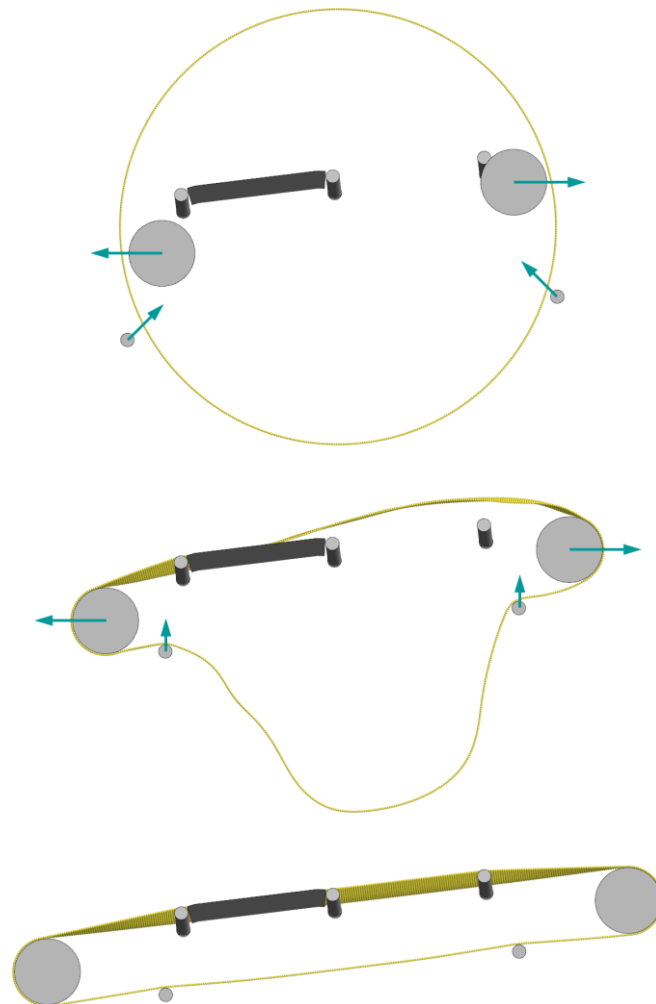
Stretching method: assembling a belt initialised in cylindrical shape by moving several system components (idlers/pulleys) to assemble the system
